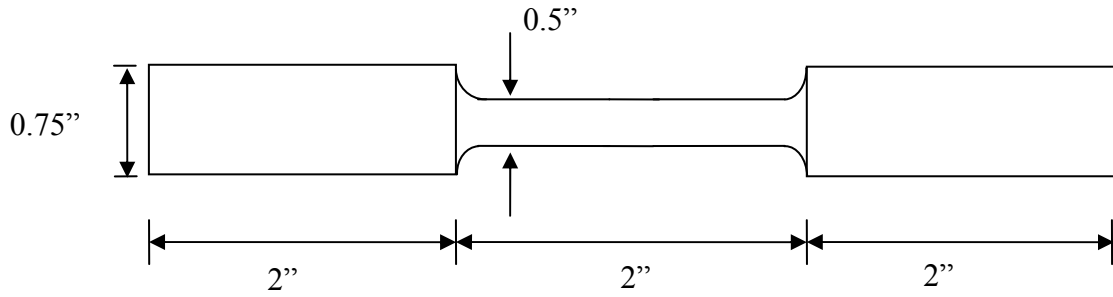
Detail of standard tension all-weld and base metal test coupons
